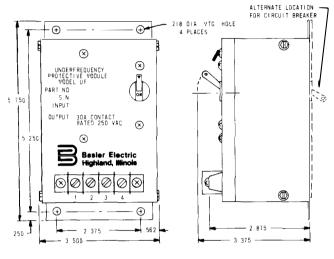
OUTLINE DRAWING (UF312/UF324)
